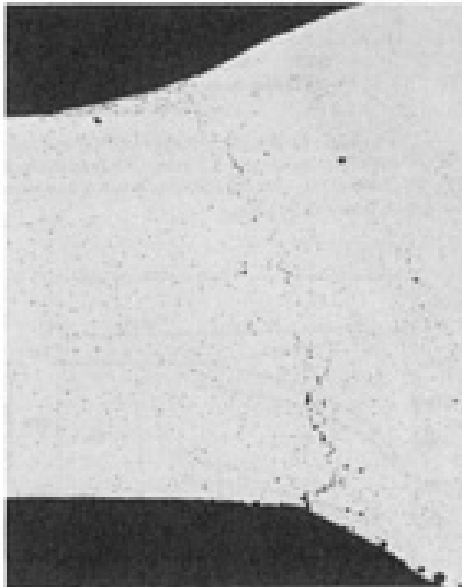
MICROGRAPH OF A GAS-TUNGSTEN ARC WELD ON 2.0 MM (0.080 IN.) THICK 6013-T6 BASE METAL WITH 5356 FILLER ALLOY SHOWING CRACKS IN THE PARTIALLY MELTED REGION. SOURCE: REF 20
